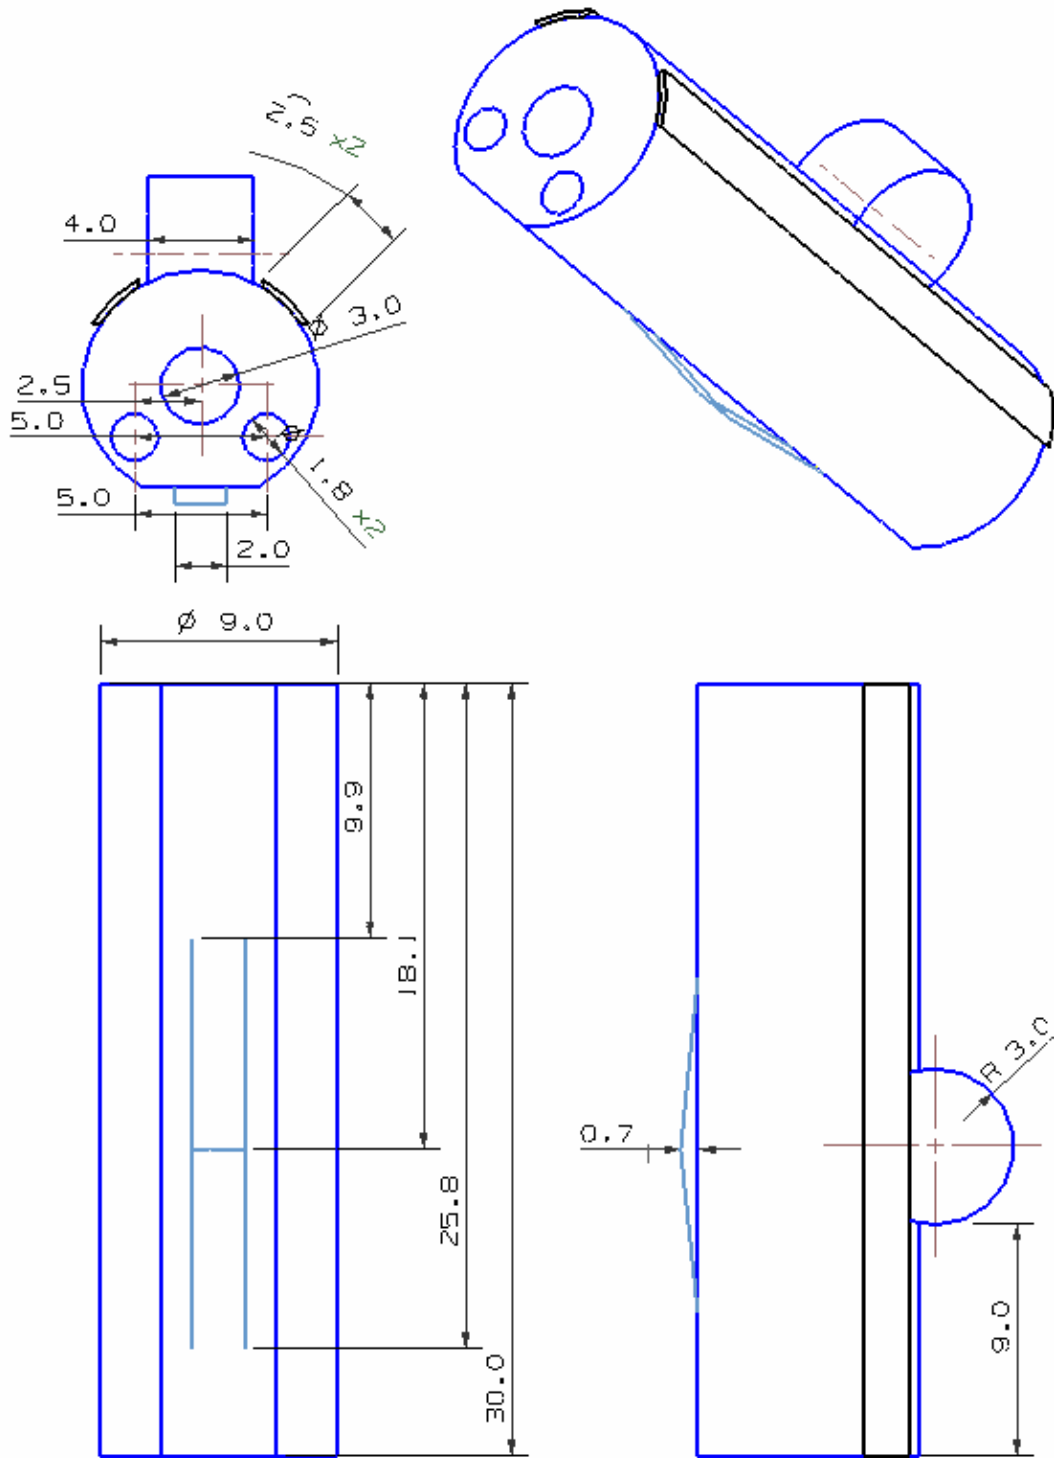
Open Surgery Cooling Channel Dimensioned Drawings
